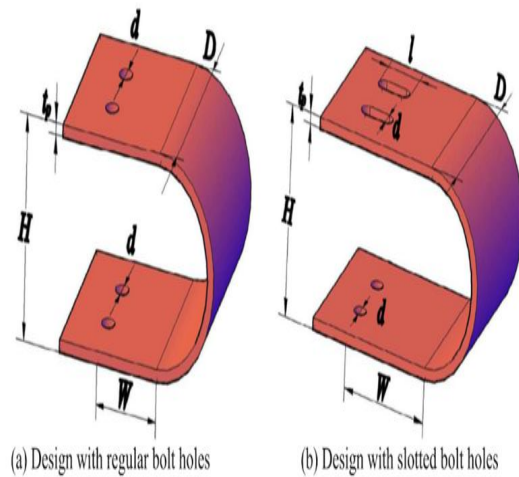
U-shaped steel plates' geometrical parameters: a. design with regular bolt holes, b. design with slotted bolt holes
